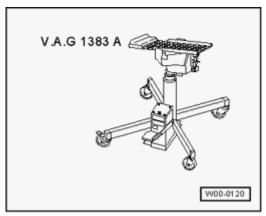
Identifying Engine/Transmission Jack V.A.G. 1383 A Courtesy of VOLKSWAGEN UNITED STATES, INC.
